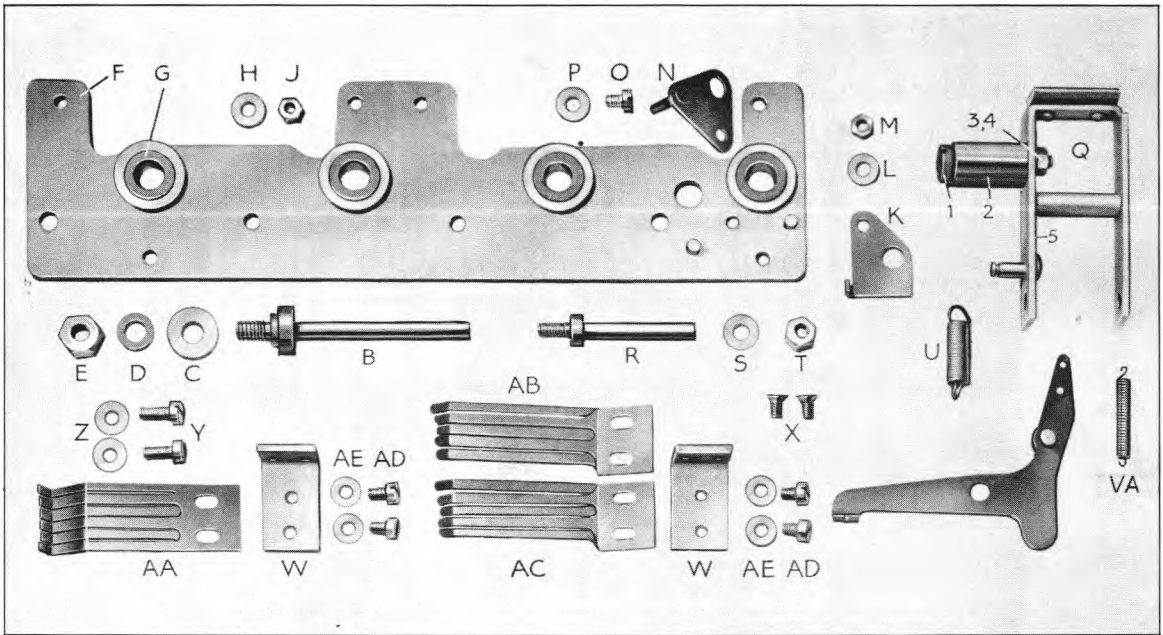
TRANSFER UNIT COMPONENTS (For C.T. Keyboards)
